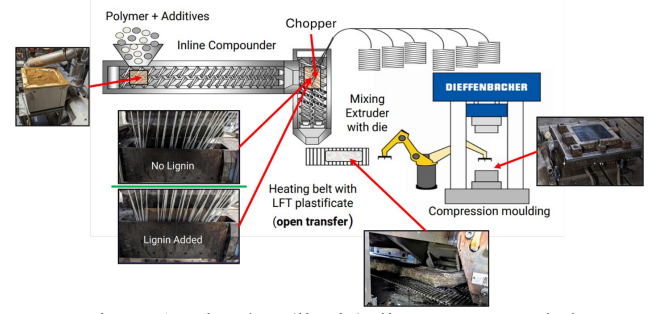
Glass/PP (lignin) direct compounded compression moulding process at FIP.
